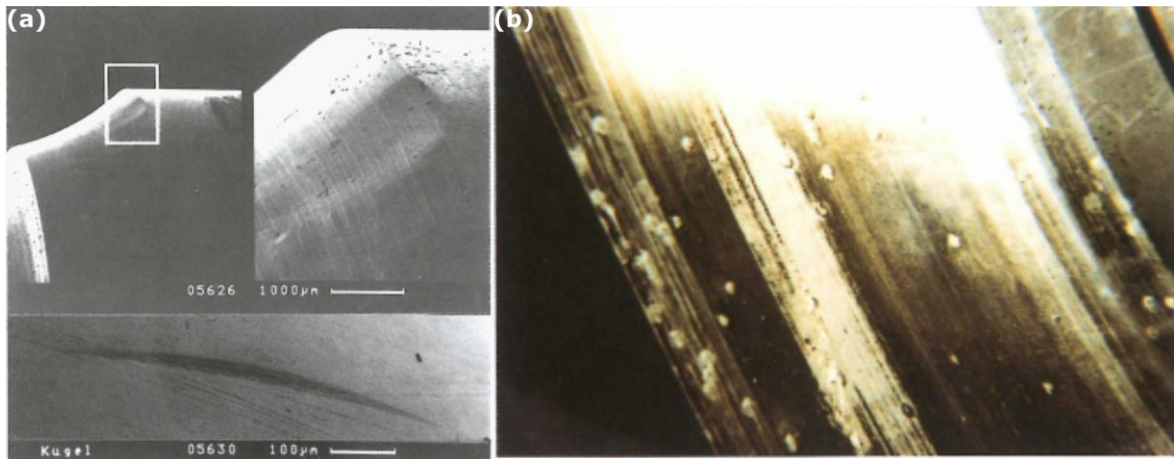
Failure mechanisms of a wind turbine gearbox bearing
